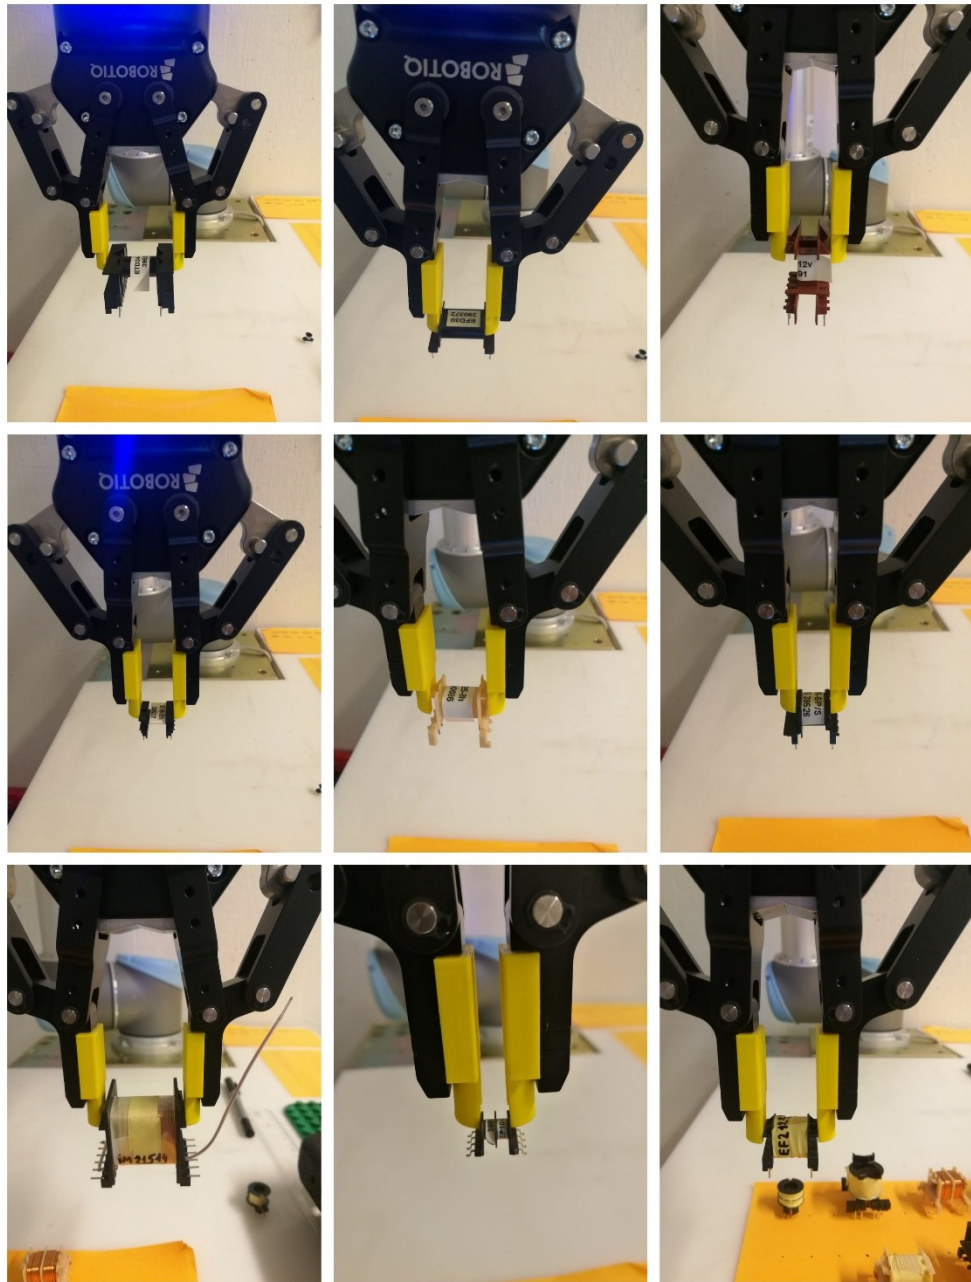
The 4<sup>th</sup> 3D printed prototype of universal gripper finger
